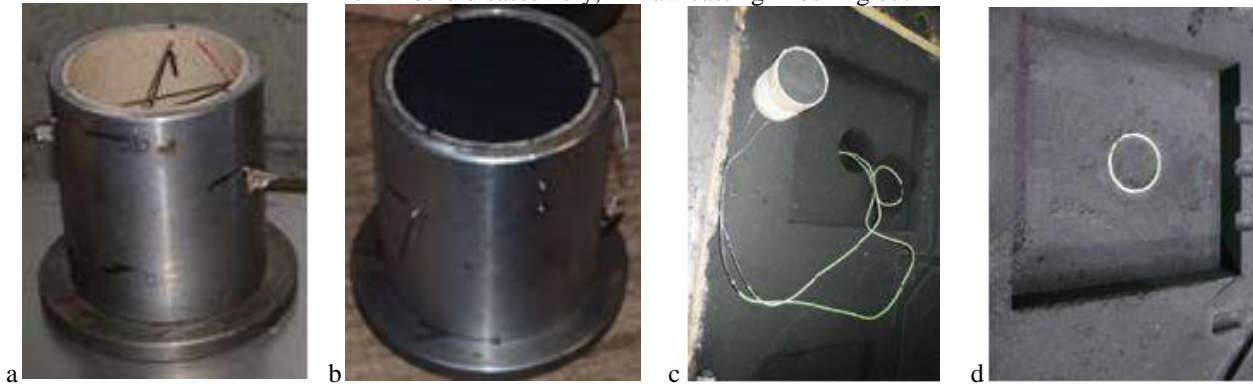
Measuring core – preparation procedure: a – core box with thermocouple positioning pins (6–15–35–75 mm), b – compacted core, c,d – core before and after installation in the mould cavity
